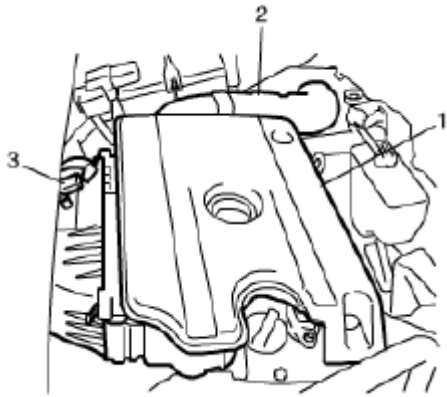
Identifying Air Cleaner Inlet Hose, Outlet Hose & MAF Sensor Connector
